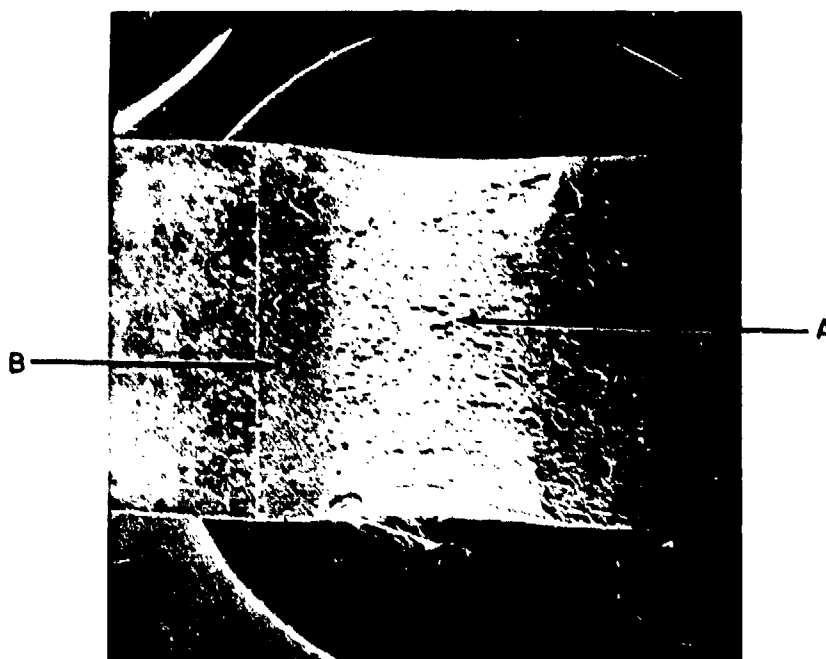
Fracture surface of a hydrogen-embrittled A-514 plate fatigue specimen, 8x.
